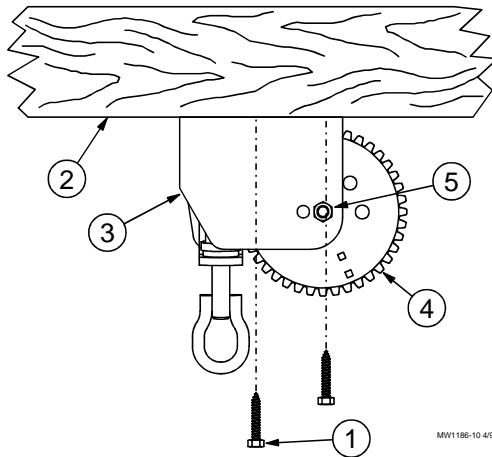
Offset the Screw/Ceiling Hooks (side view)
